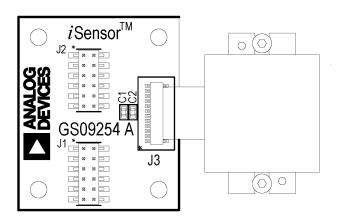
Basic ADIS 1635x/PCB Assembly View
